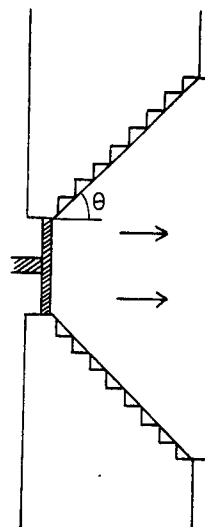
Division of a shear plane to horizontal &amp; vertical planes
